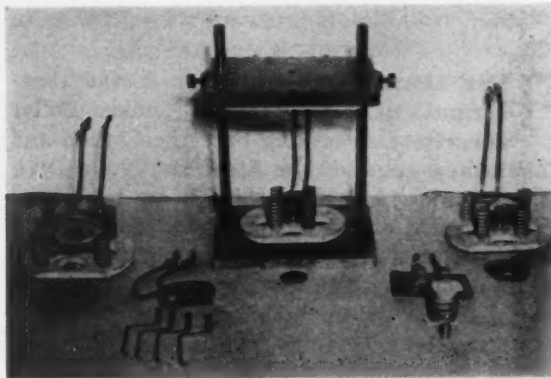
Typical induction heating fixtures (with coils) used in the heat treatment of the parts shown.
